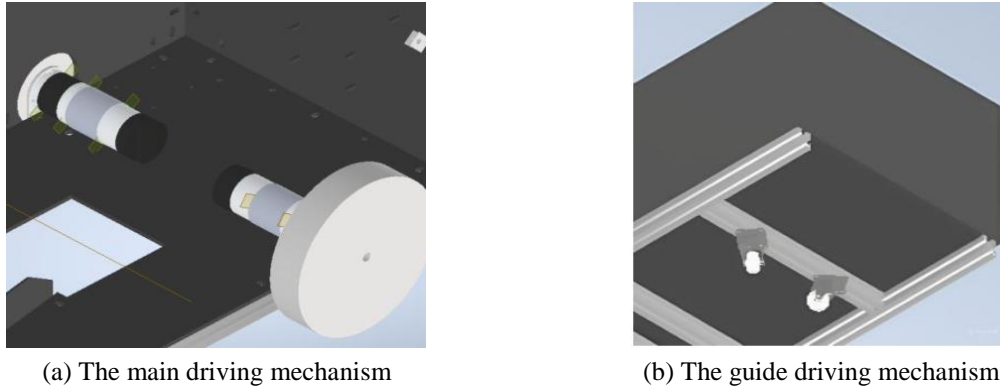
Robot chassis with 20x20 Aluminium Extrusion.
